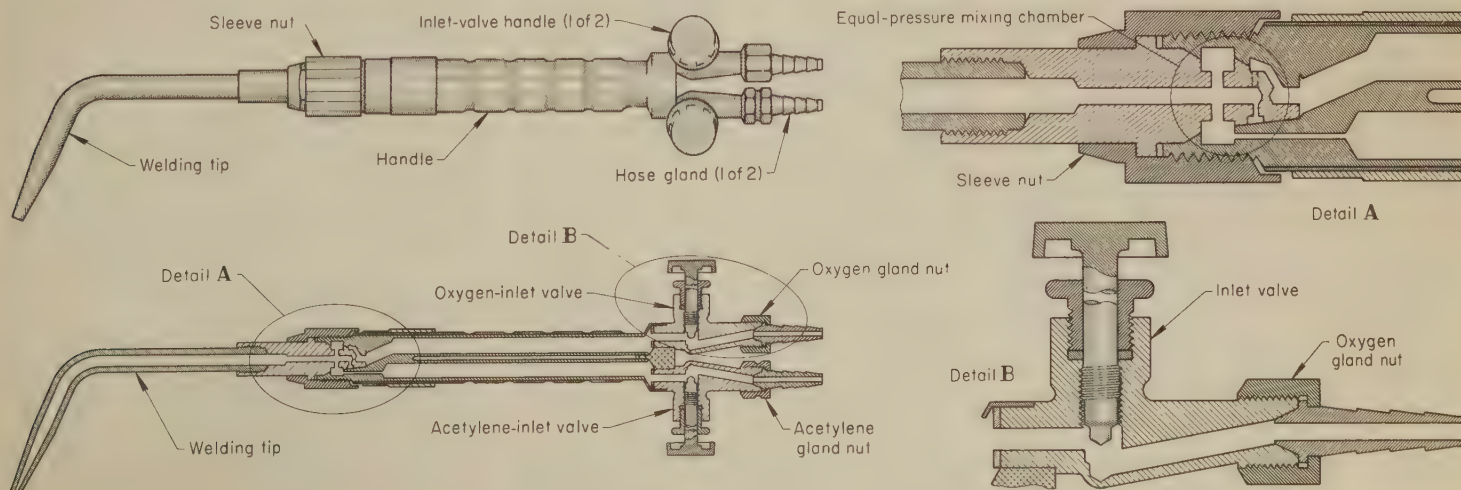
General construction of an oxyacetylene welding torch
